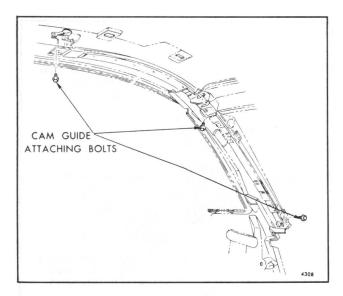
Tailgate Window Right Guide Cam Attachment
